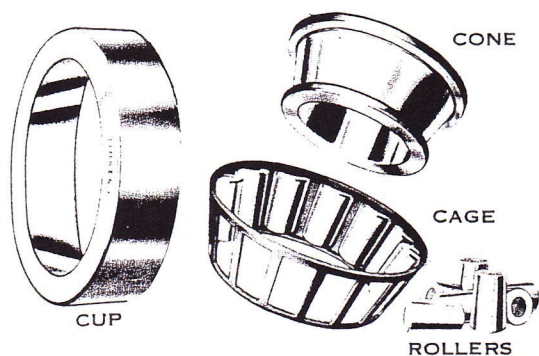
Major Component Parts of a Wheel Bearing.
